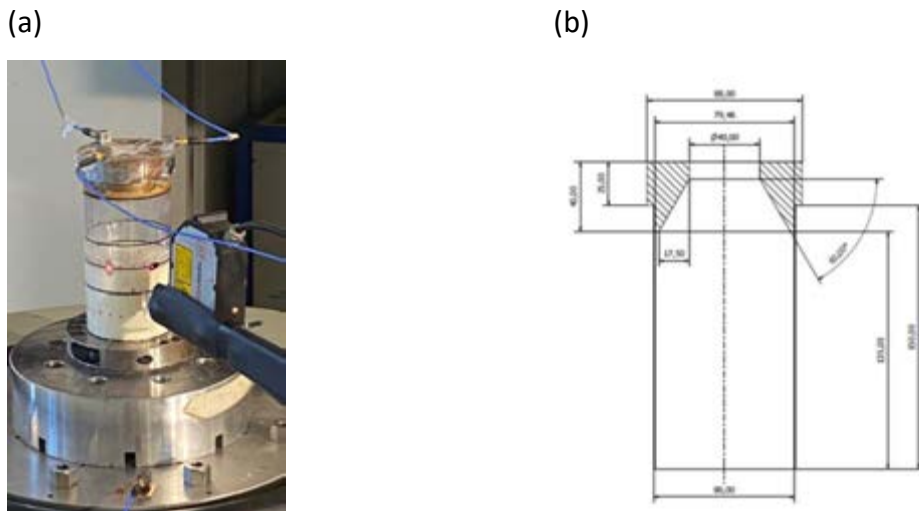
(a) Test specimen partially filled with oobleck, and (b) shell-disk assembly technical drawing.
